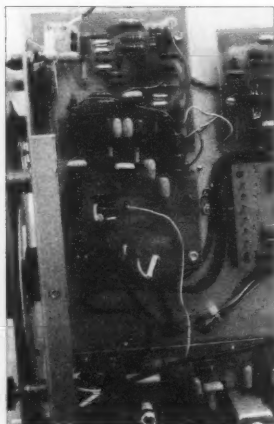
Photo A. The audio mixer and preamplifier board inside the Century 21. This board is located on the bottom of the chassis.
